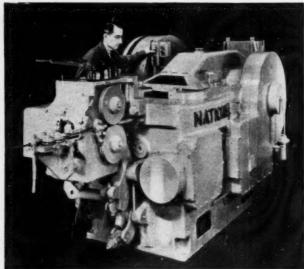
National %-in. Capacity Double-stroke Cold Heading Machine
